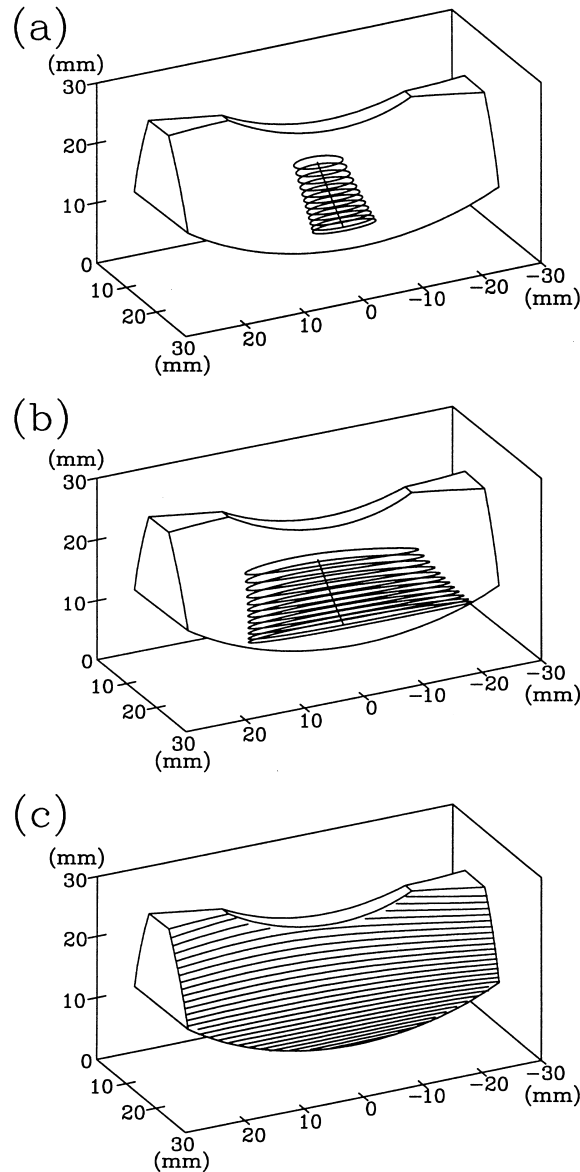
Bearing contacts and contact paths of the ZN-type worm gear set under different oversize hob cutter pitch diameters.
